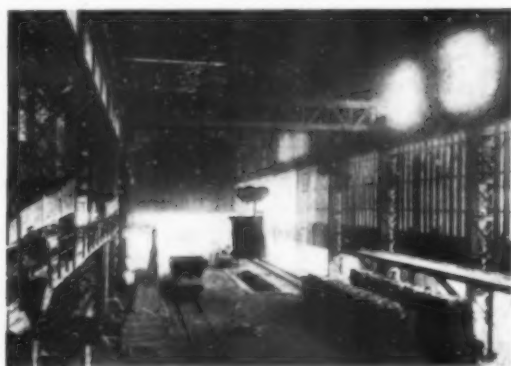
A Welsh plant of 60-ton basic open-hearth furnaces served by a guided "tong crane" in addition to the Wellman ladle crane.
